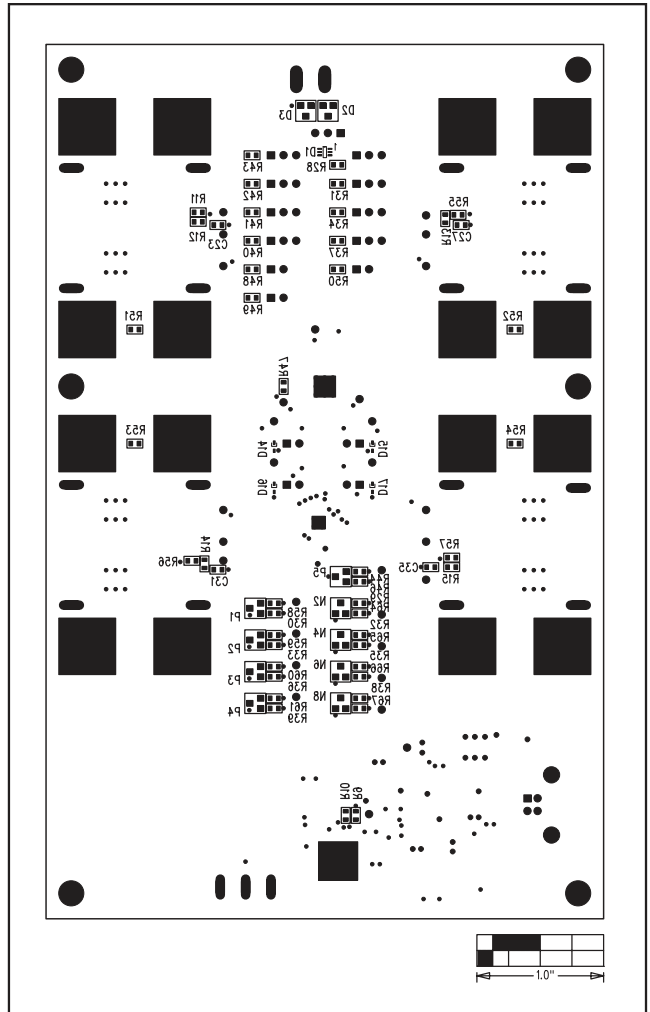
MAX5961 EV Kit Component Placement Guide—Solder Side
